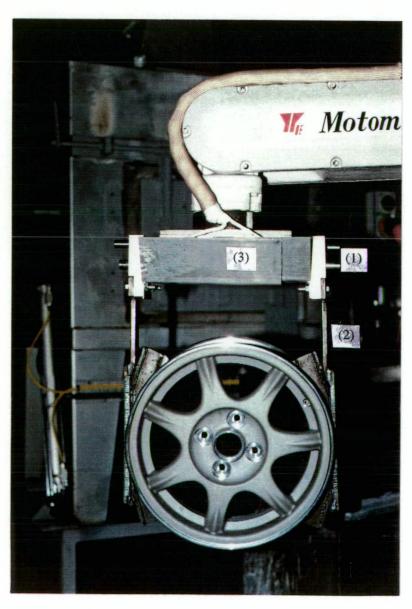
Robot Gripper, Gripper Arms and Protective Heat Shield
